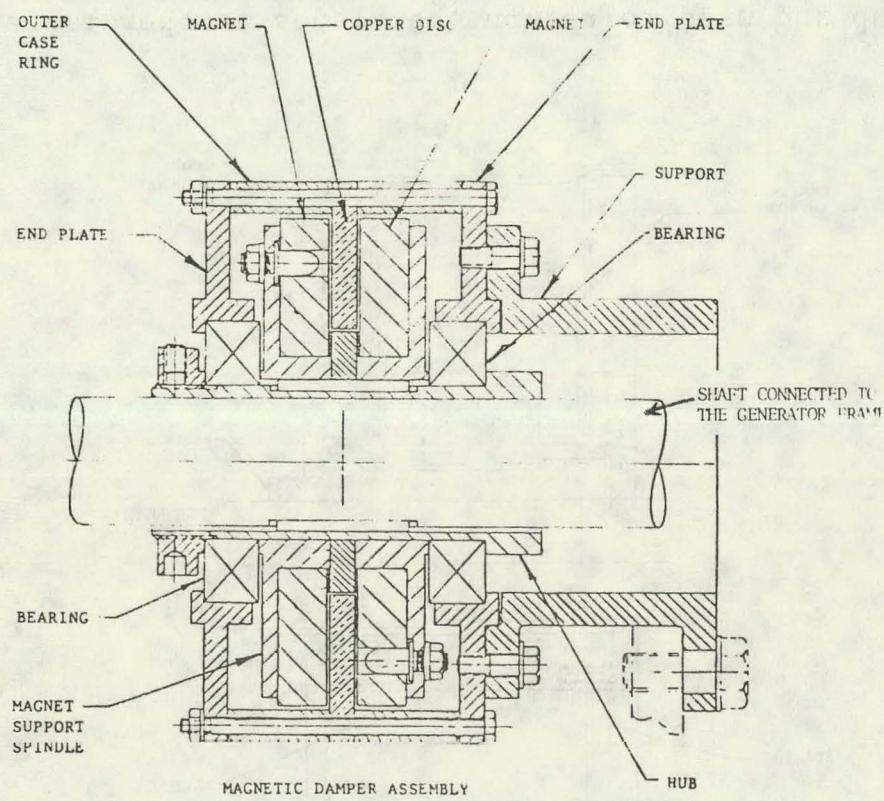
MAGNETIC DAMPER ASSEMBLY
